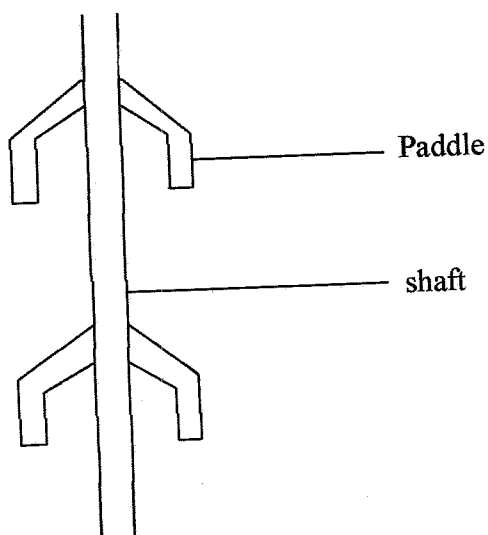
Showing shape of the paddle welded to the shaft.
